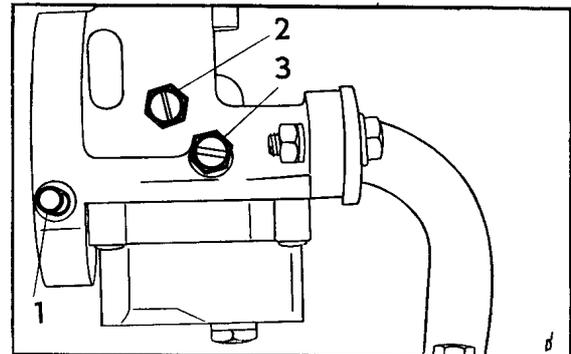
Carburettor 1. Saturator pin. 2. Mover stop screw. 3. Regulating screw for richness of idle run mixture.
